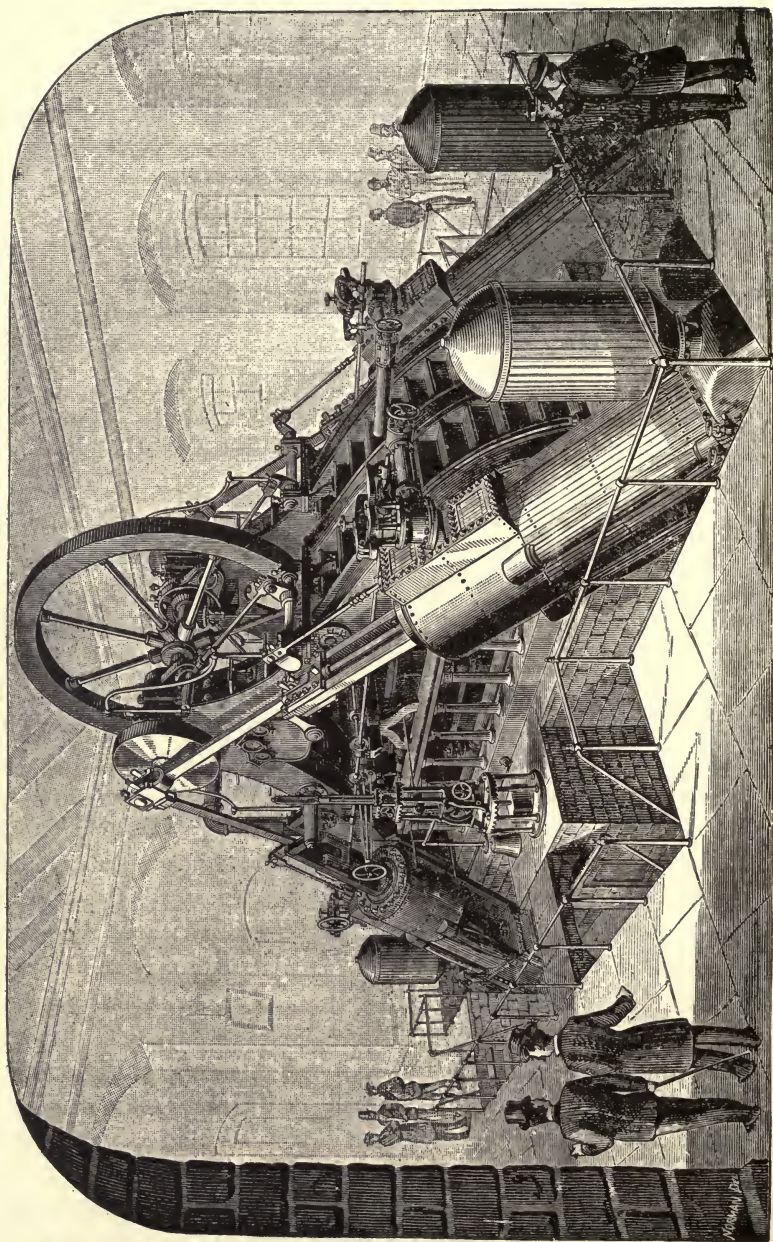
Framing of Holly Quadruplex Pumping Engine.
